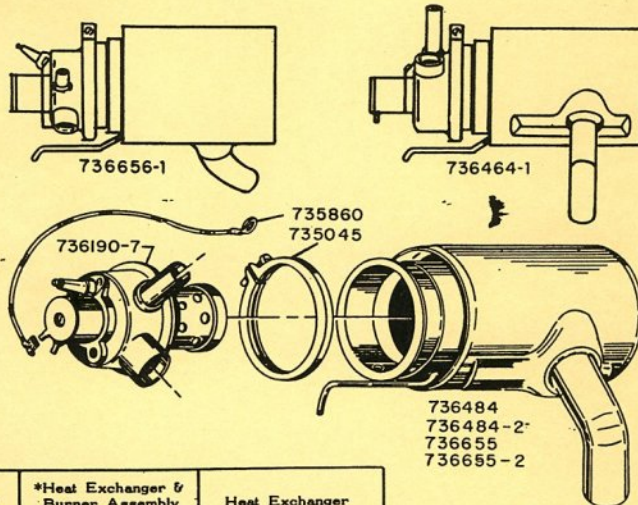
HEAT EXCHANGER & BURNER ASSEMBLY
